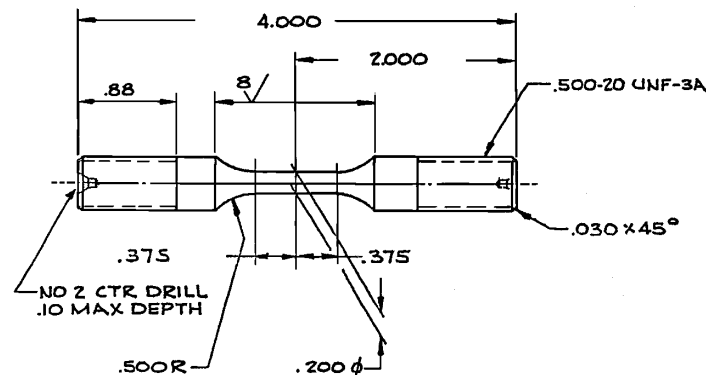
0.2-inch diameter cylindrical GEAE HCF specimen with threaded ends.
